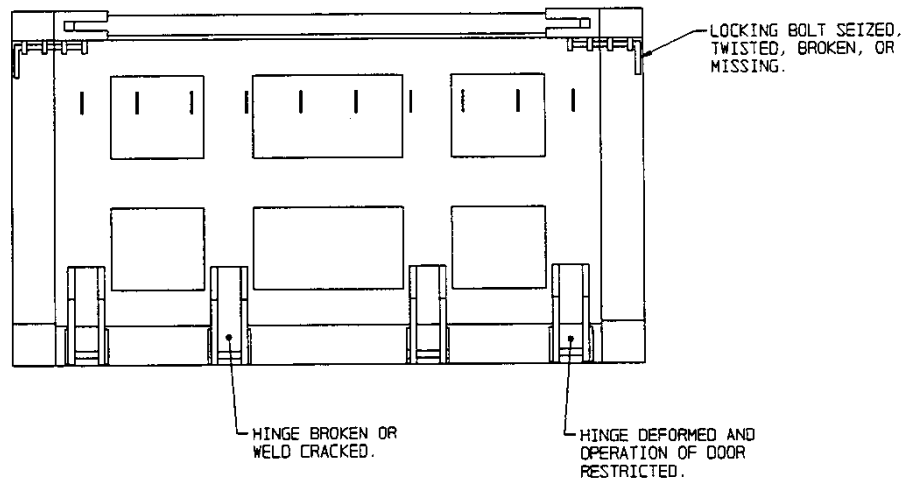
RAMP TYPE DOOR DAMAGE
